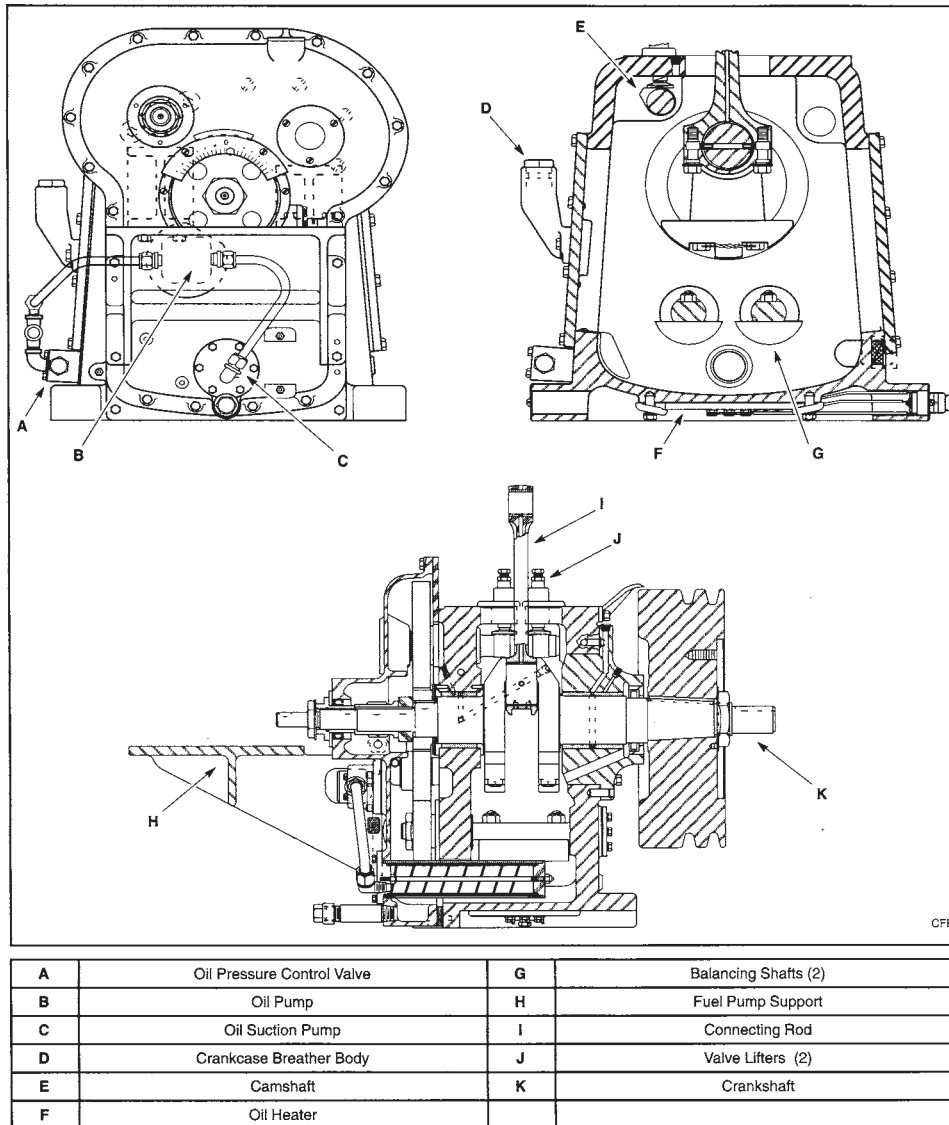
CFR-48 Crankcase—Sectional Views
